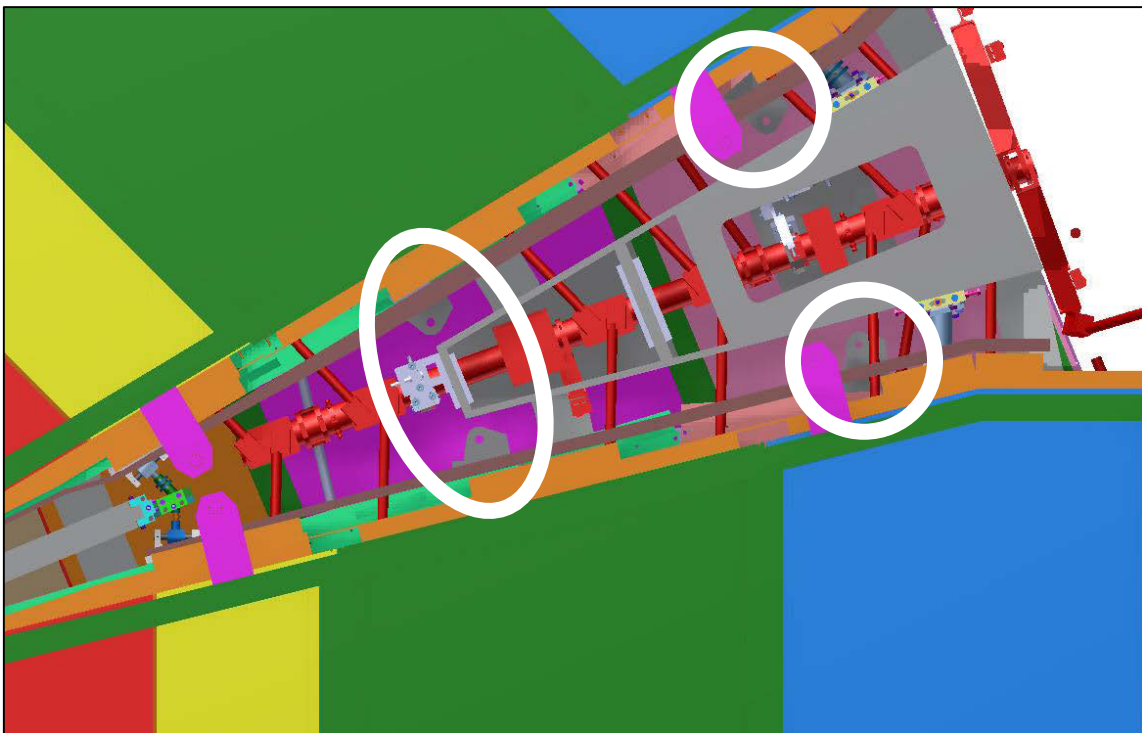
Installed large sector spacer frame mounts (Sinclair & ATLAS, 2015).
